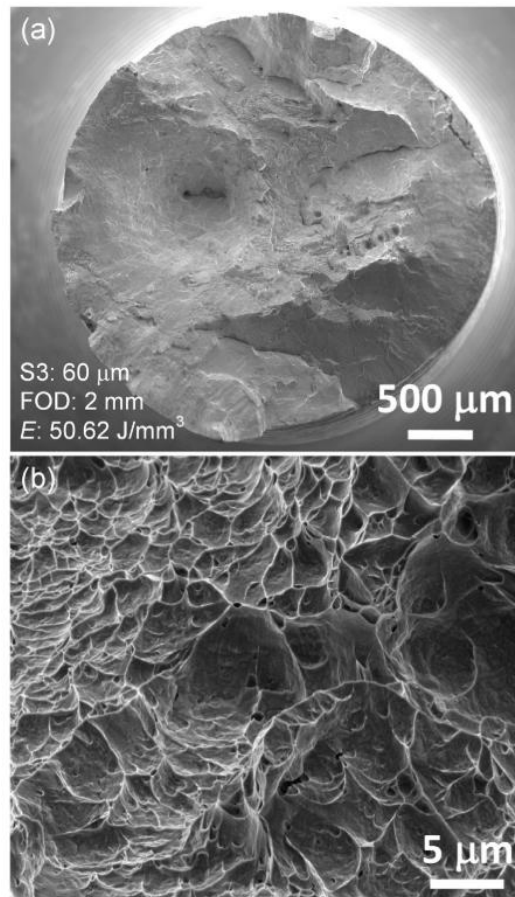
(a) SEM images of cup-cone structure fractures and (b) dimple fractures in Ti6Al4V part produced by LPBF [49]
